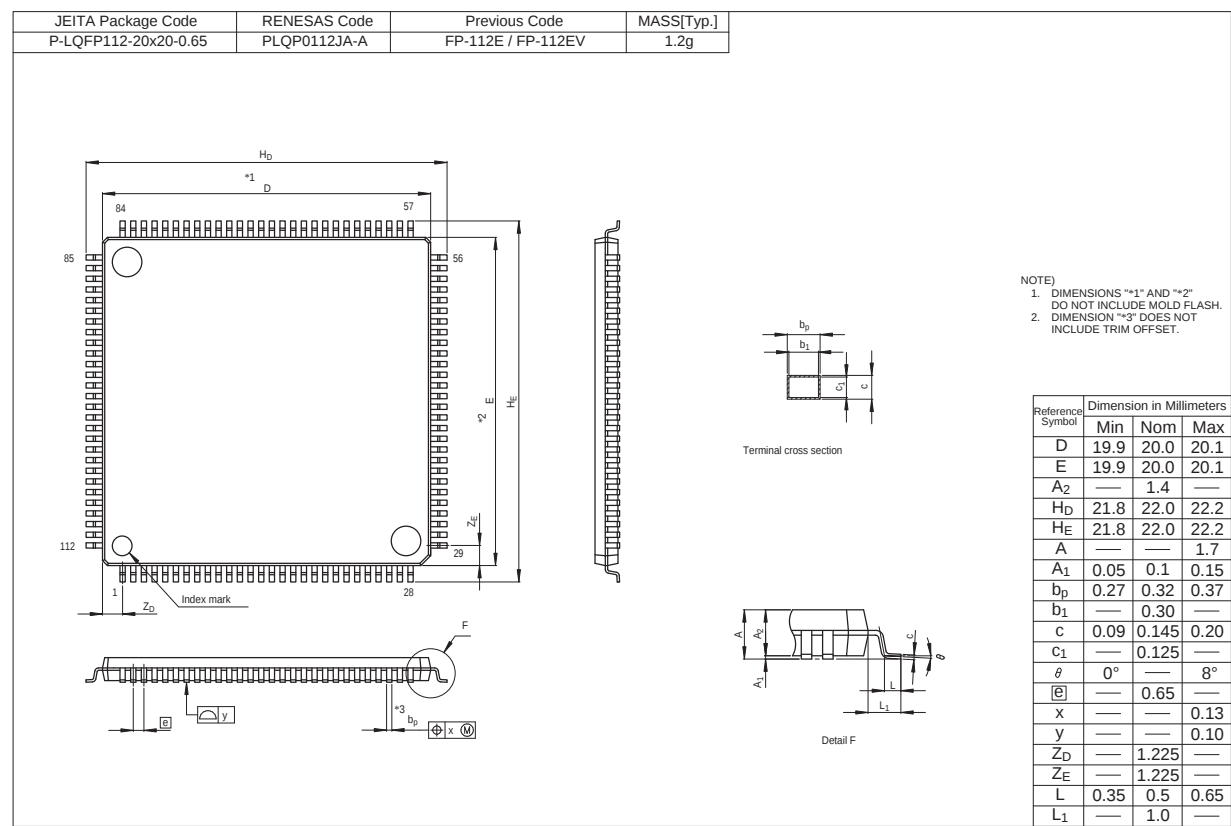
Pin LQFP (PLQP0112JA-A) Package Dimensions
